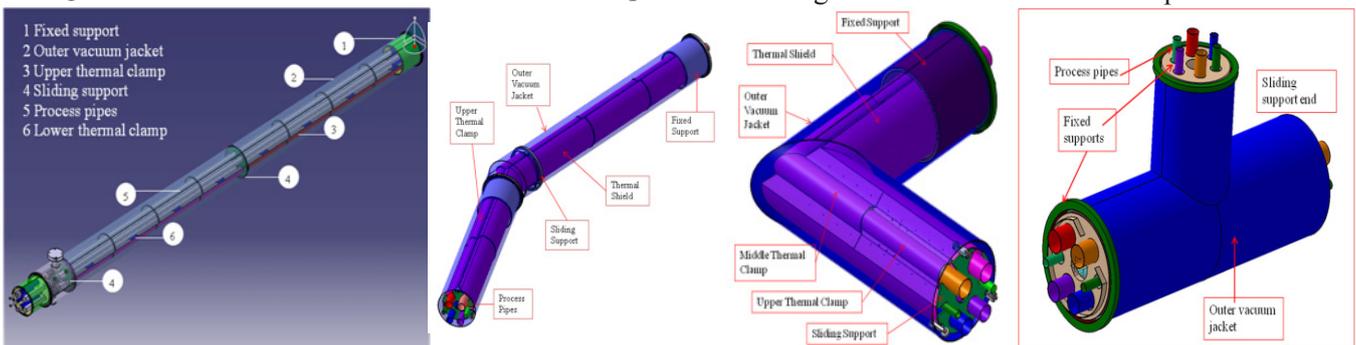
(a) Straight section (b) Elbow section (c) C – section (d) T - Section
